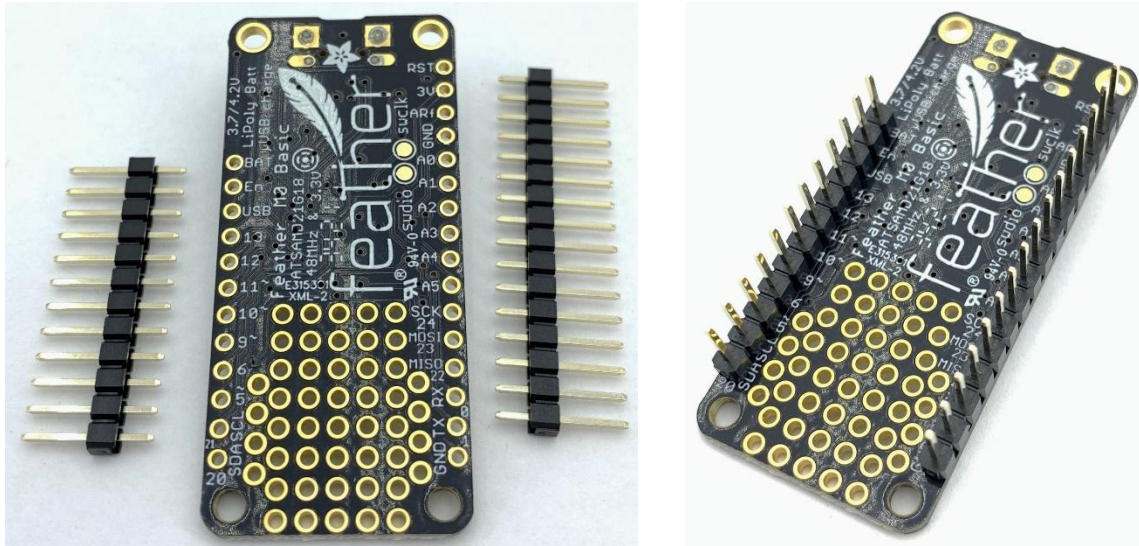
Feather M0 bottom with separate headers (left) and assembled (right).
